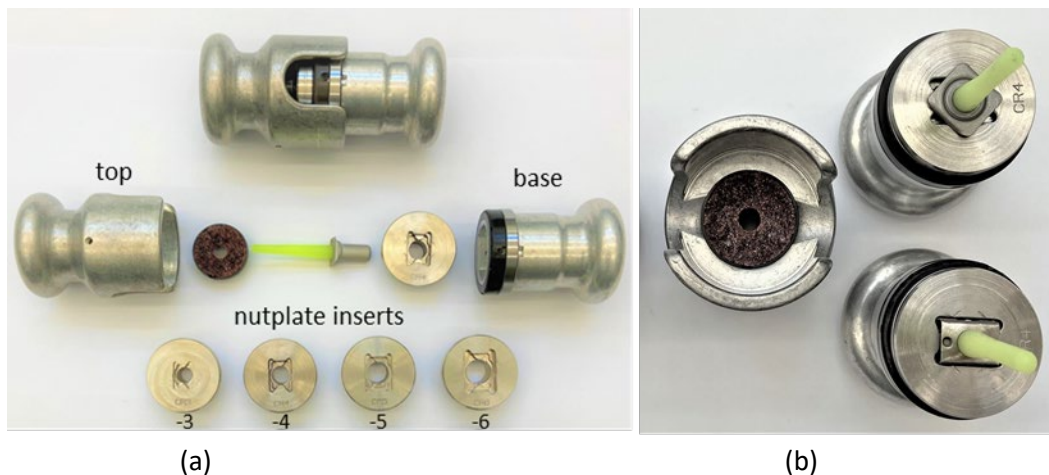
Nutplate Abrasion Tool (NAT) (a) Exploded view (b) Top view
